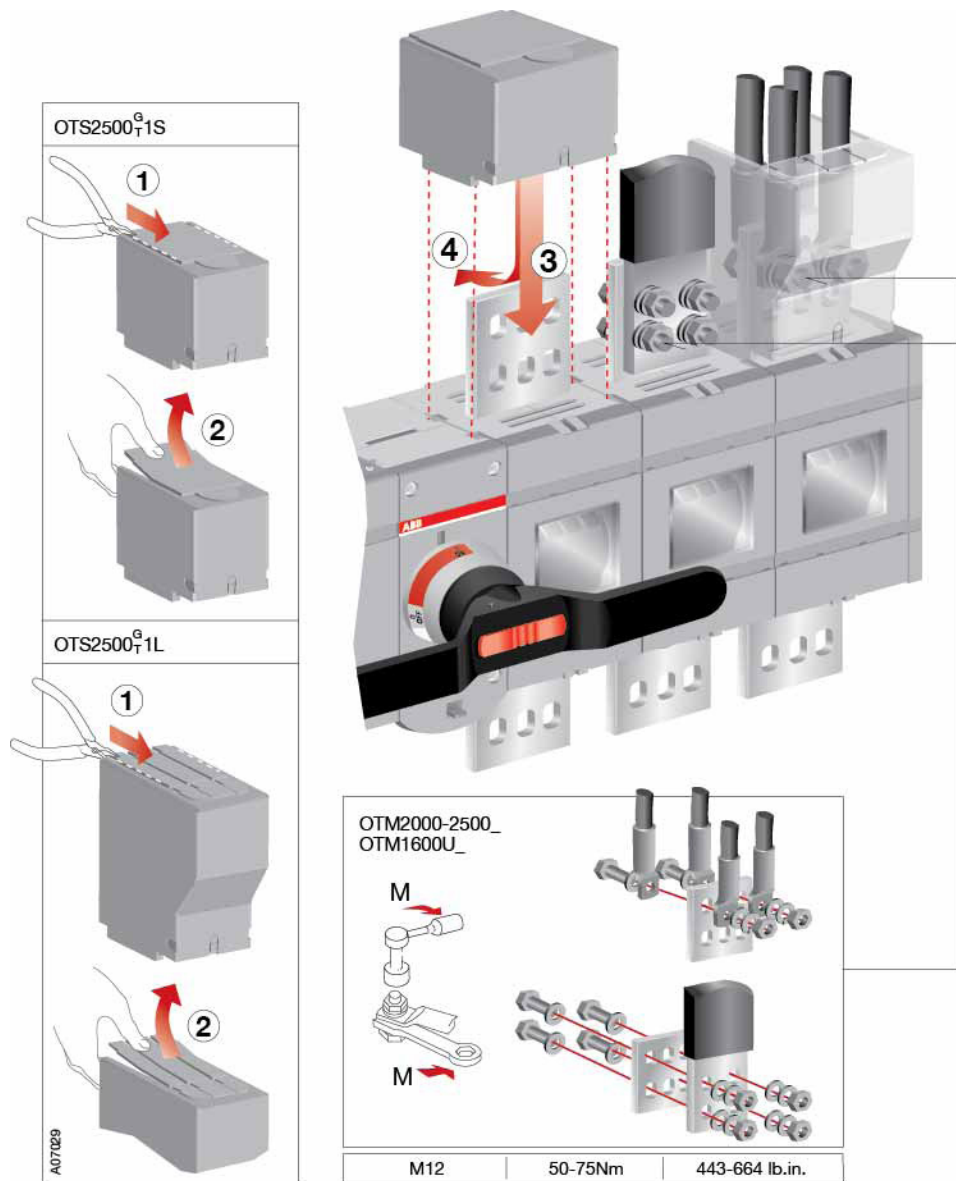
Mounting of the terminal shrouds (type OTS_) to the motorized switch-disconnectors OTM2000-2500E_ and OTM1600U
